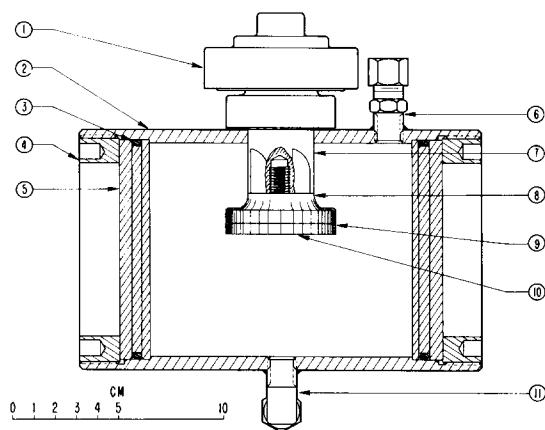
Scale drawing of rotating disk reactor vessel. 1—Magnetic coupling; 2—reactor body (Hastelloy B); 3—O-ring seal (Parker # 2-241, ethylene-propylene); 4—threaded retainer ring (Hastelloy B); 5—end plate (Hastelloy B); 6—gas line connection (Hastelloy B); 7—sample holder base and impeller (Teflon); 8—sample holder (Teflon); 9—shrinkable tubing (Teflon); 10—sample disk; 11—liquid inlet (Hastelloy B).
